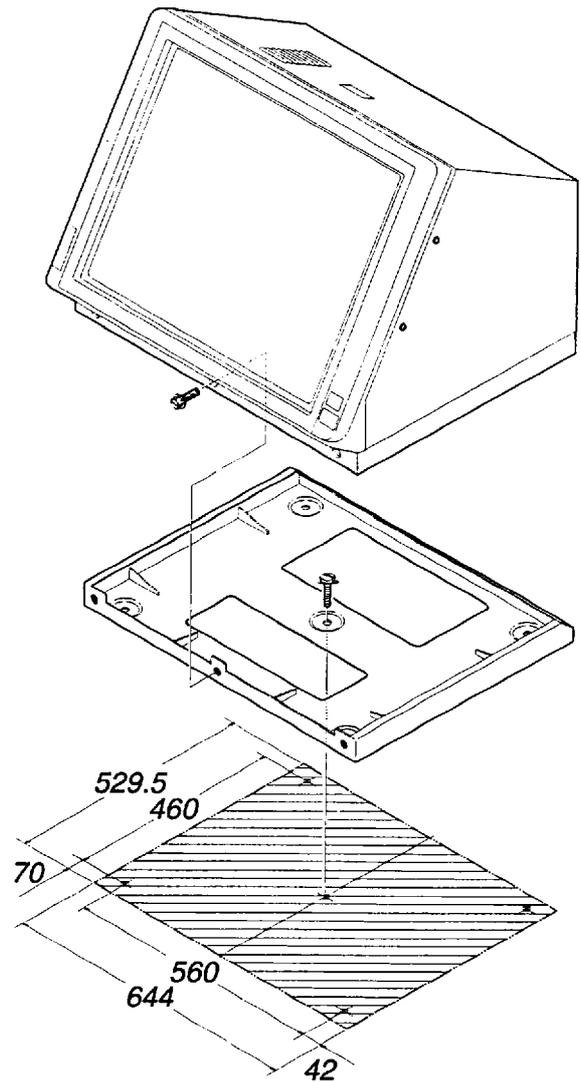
Mounting dimensions for tabletop mount display unit
